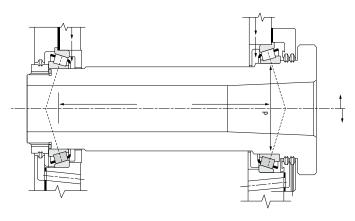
Simple mounting with a pair of TS or TSF bearings.
